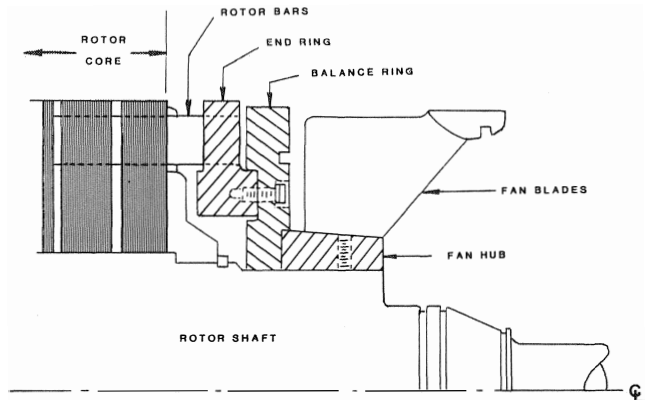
Original Rotor Cross Section Showing Balance Ring/Support Ring Assembly.
